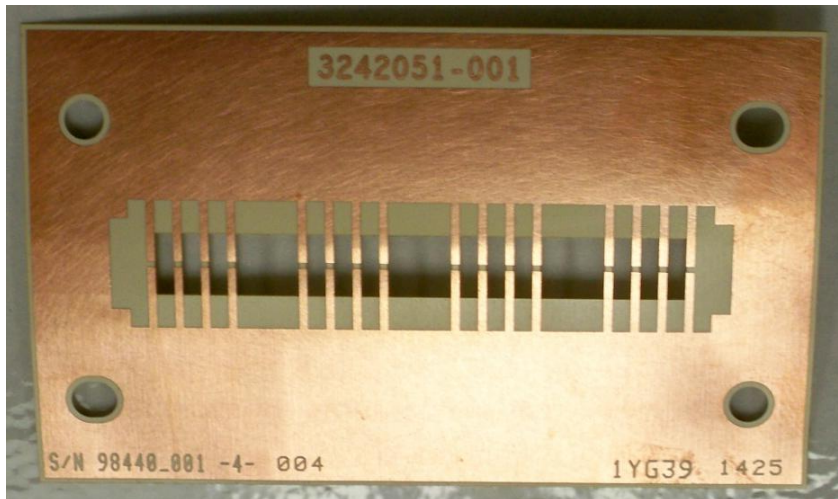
Fabricated PWB for 8 Sets of LCP Springs Before Singulation and Forming
